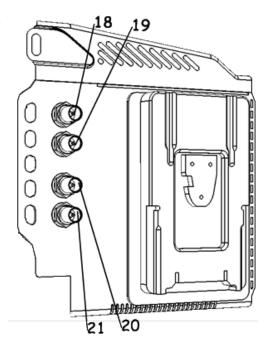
CopperHead 3404 Camera Unit Front Side Connections
